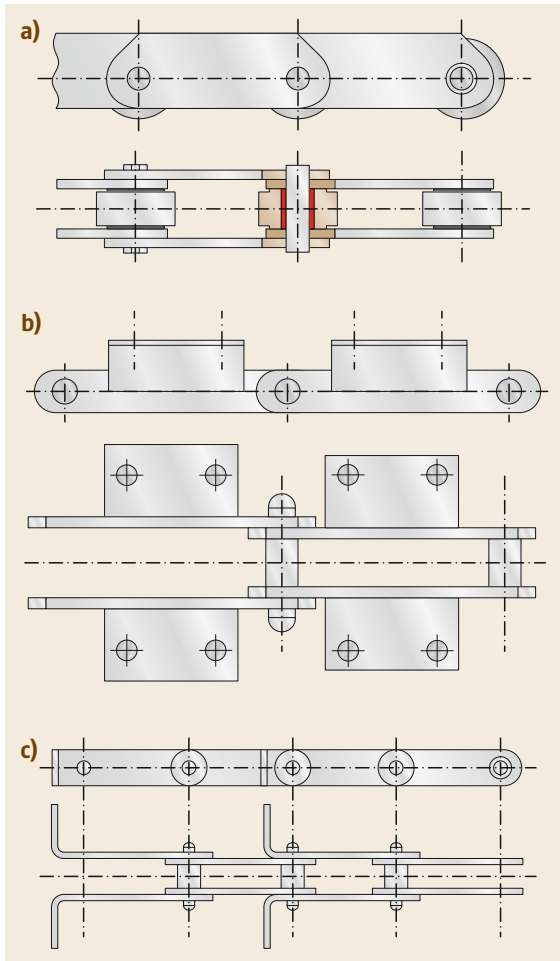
c Steel link chains with special link plates: (a) deep link chain, (b) link plate with horizontally cranked link plates for, e.g., bucket elevators and apron feeder-type conveyors, and (c) link plate with sideways cranked link plates for, e.g., trough conveyors
